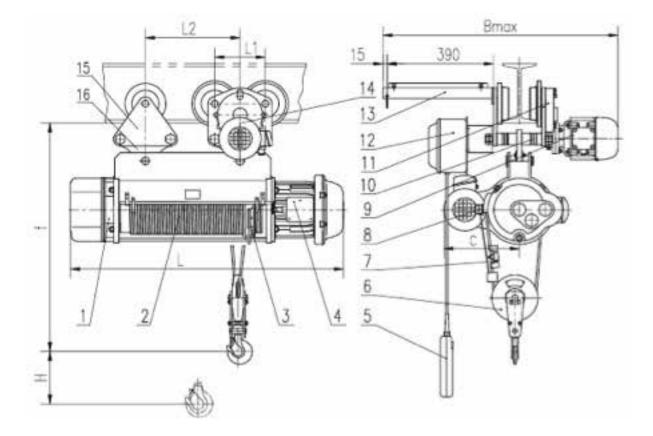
Outline Structure Drawing for PWMD3T24M and PWMD5T24M Electric Hoist
